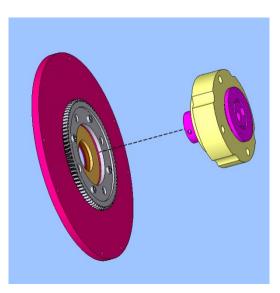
Removing Screws Securing Bearing Housing Assembly to Ring Gear
